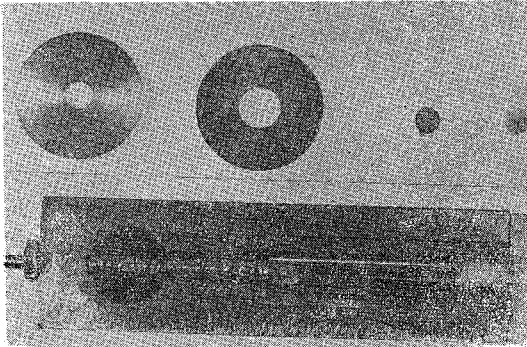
A stainless-steel cylindrical mold of ejector type for making amalgam specimen.
